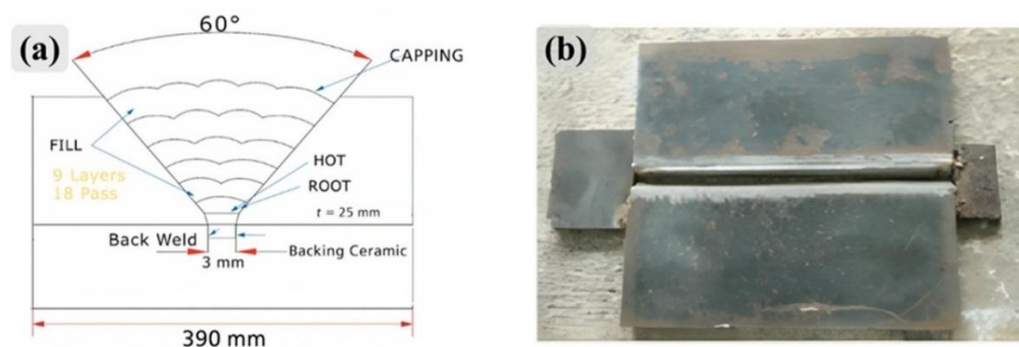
Weld joint configuration: (a) schematic illustration, (b) V-butt joint specimen.
